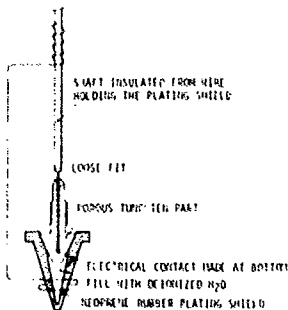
Holding Fixture for Electroplating Porous Tungsten Part with Gold to Seal Pores
